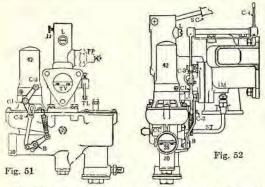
Side view showing the control levers C1, C2, C3. Fig. 52. End view showing the control levers and connection of suction tube (ST) from carburetor (CC) to inlet manifold (IM).
